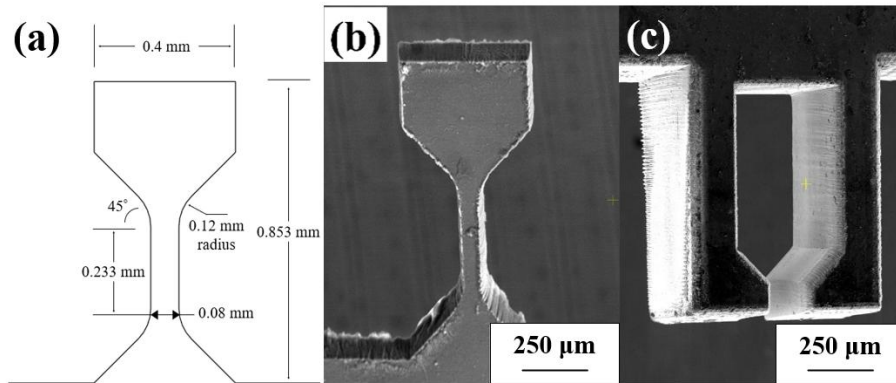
a) Dimensioned drawing of meso-scale tensile bar. b) fs-lasered mesoscale tensile bar. c) fs-lasered shoulder gripper for testing
